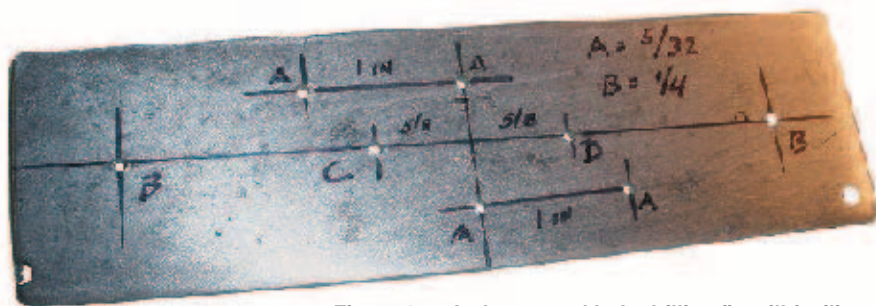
A sheet metal hole drilling jig will facilitate getting all the pilot holes in the right place.
